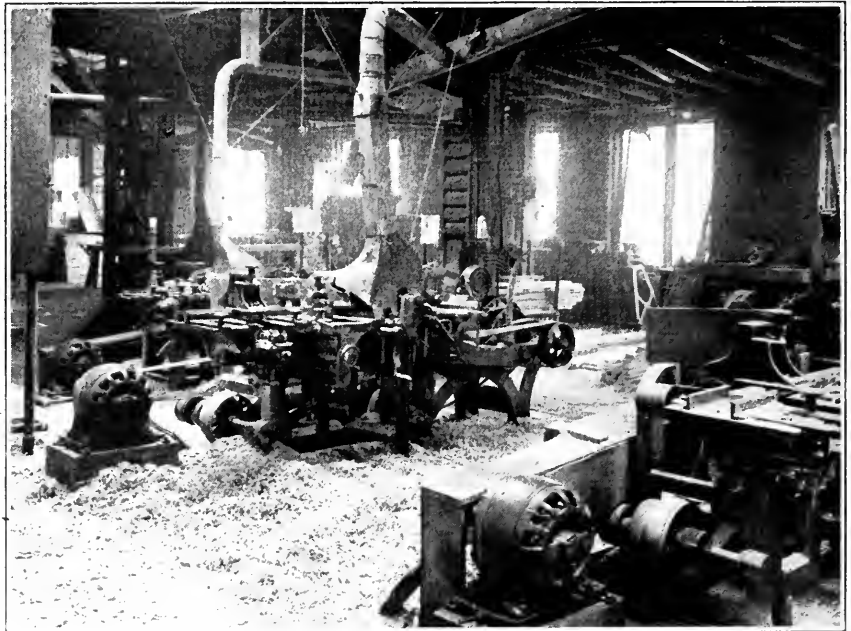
GROUP OF SMALL MOLDERS BELTED TO BALL-BEARING MOTORS
